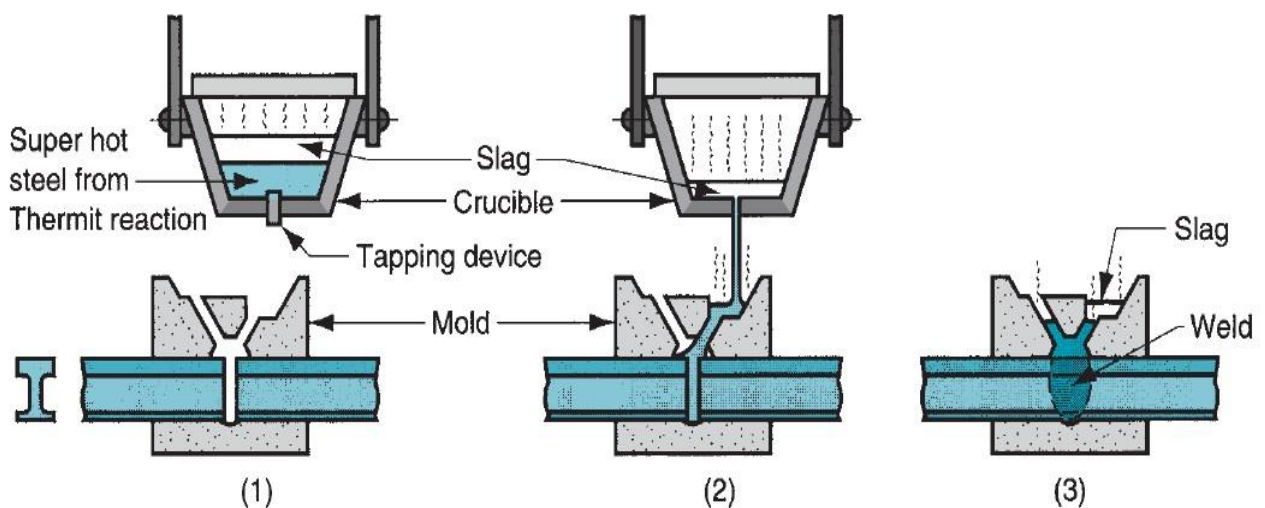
Thermit welding: (1) Thermit ignited; (2) crucible tapped, superheated metal flows into mold; (3) metal solidifies to produce weld joint.
